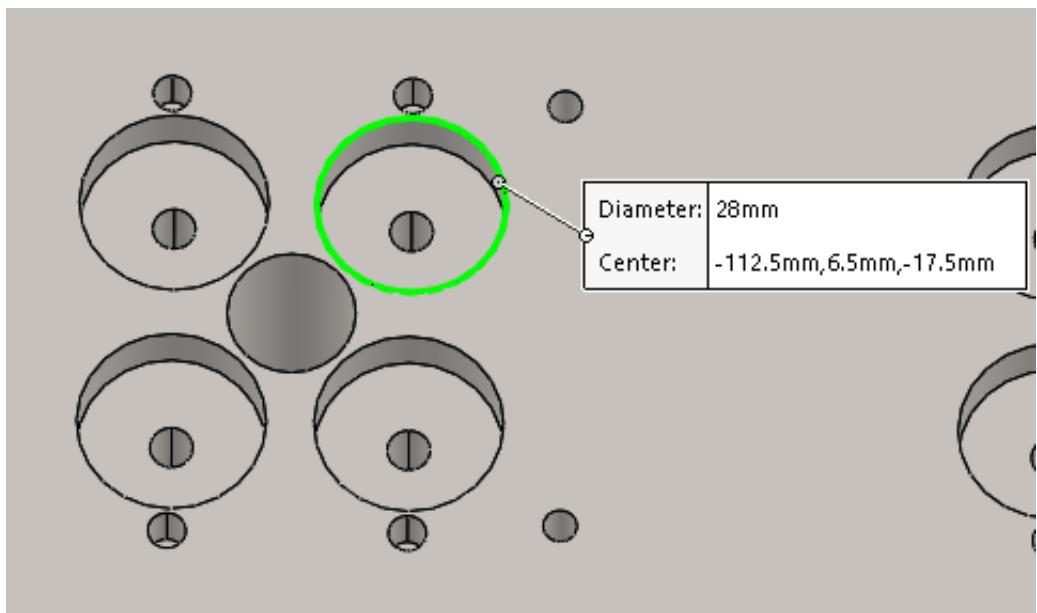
CAD and dimension of the valves designed and to be optimized in previous years.
